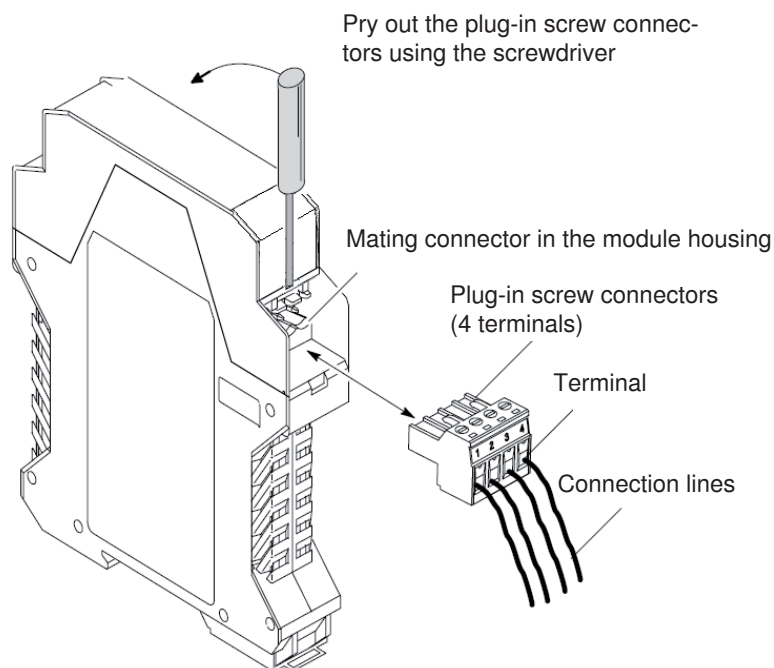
Assembly/disassembly of the plug-in screw connectors
